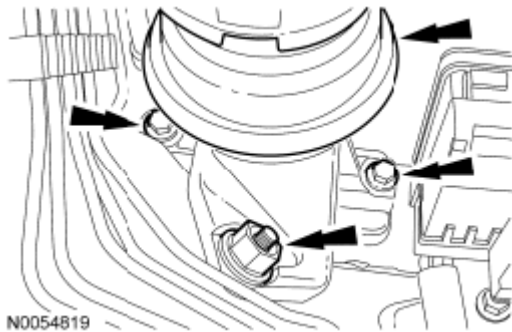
Locating RH Instrument Panel Floor Brace Bolts
